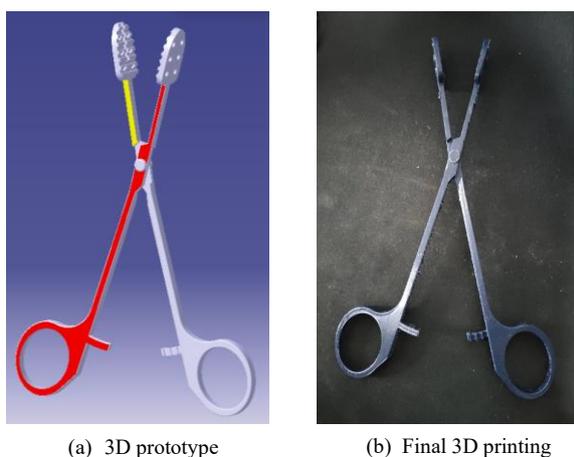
(a) Prototype before 3D-Printing by using CATIA, (b) Actual 3D-Printing tongue retractors by using Bambu Lab A1.
